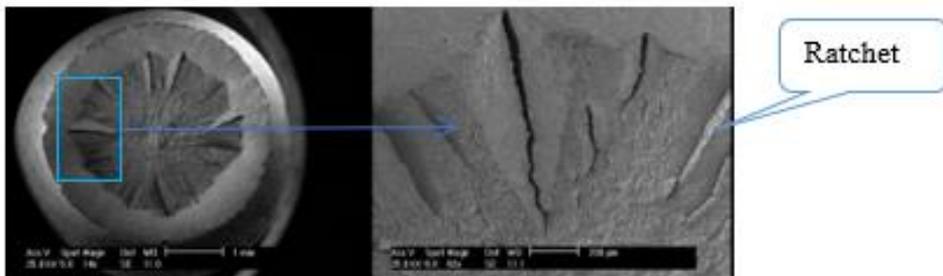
Ratcheting marks, indicated by the arrows, in an CK35 shaft fractured by tensile
